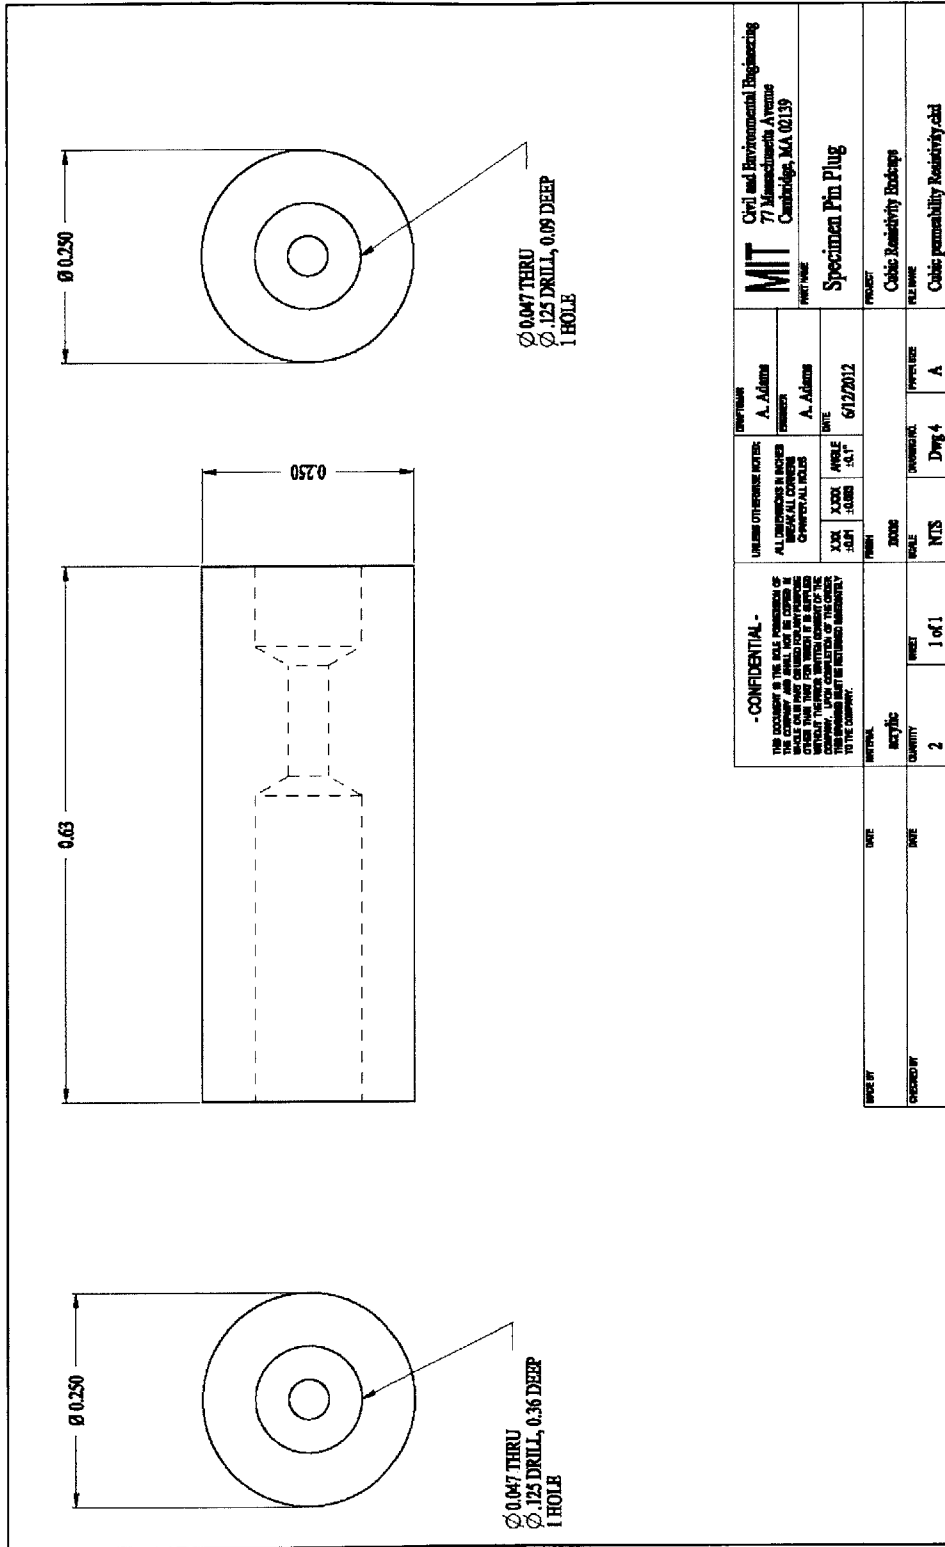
Cubic resistivity end adapters: Drawing 4, specimen pin plug
